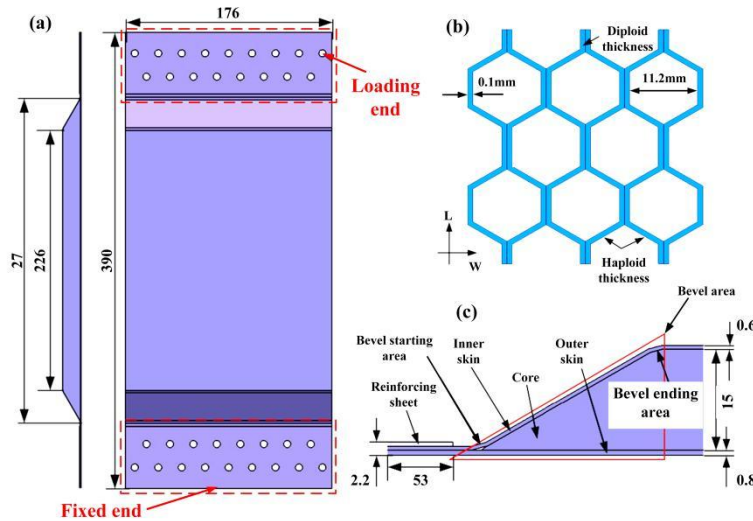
The specimen: (a) Dimensions (mm); (b) Details of the core; (c) Details of the bevel area.
